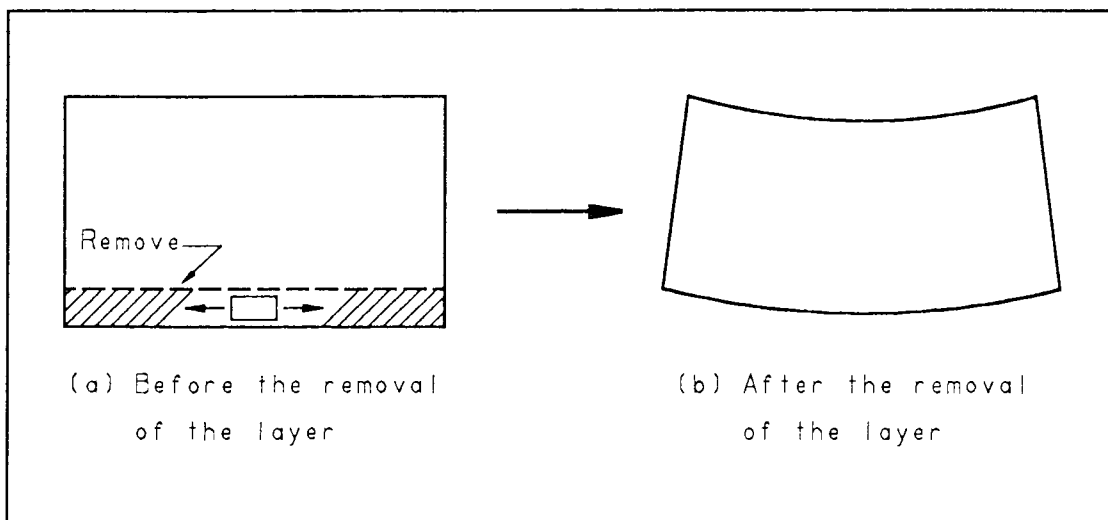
The successive milling technique, where the removed layer carried tensile stresses. Thus when removed, the specimen exhibited concave bending.
